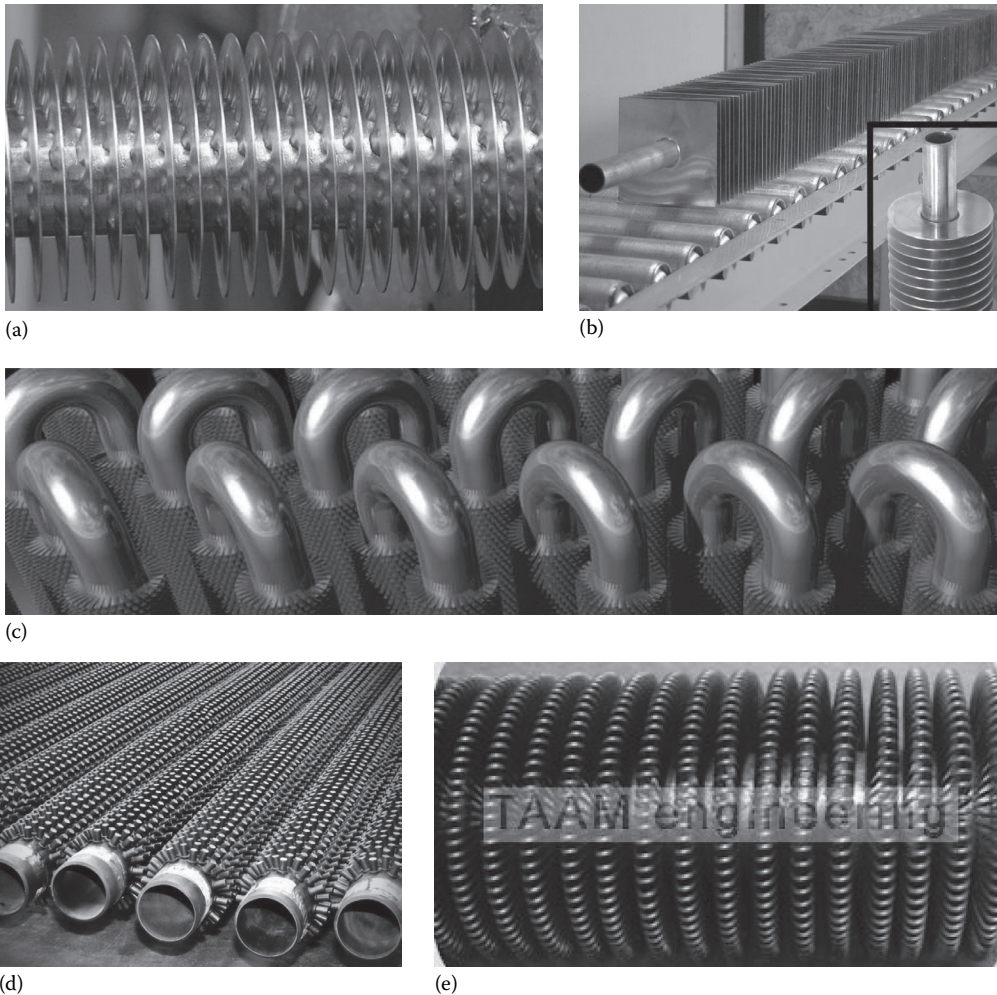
(a) Helical spiral wound crimped finned tube. (b) Annular fin or stamped fin tube. (a and b Courtesy of Fin Tube Products, Inc., Wadsworth, OH.) (c) TURB-XHF (serrated or segmented fin). (d) Stud welded tube. (c and d Courtesy of Fin Tube, LLC, Tulsa, OK; www.fintubellc.com) (e) Wire loop fin tube. (TAAM Engineering, Maharashtra, India.)
